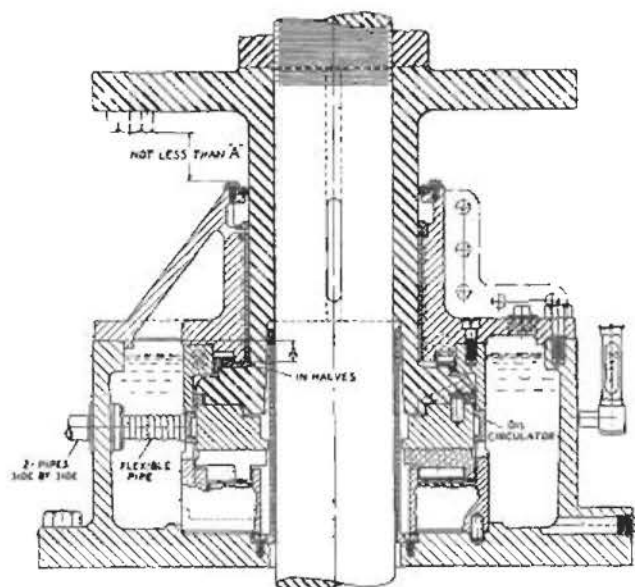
Combined thrust and radial bearing equipped with oil circulator for external cooling of the oil. Journal bearing is automatically lubricated. STANDARDIZED: See Bulletin M.
